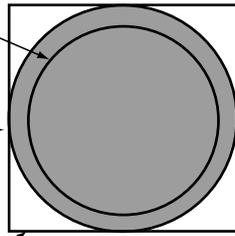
Footprint - 5 mils stencil - non solder mask defined
